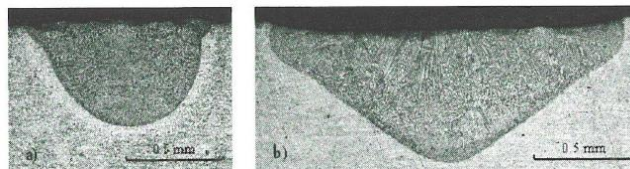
Conduction limited welds cross-section when using a) a CO₂ laser and b) an Nd:YAG laser at a power of 2000 W and a speed of 2m/s in a 2 mm thick Inconel alloy workpiece (Forsman, et al., 2001).
